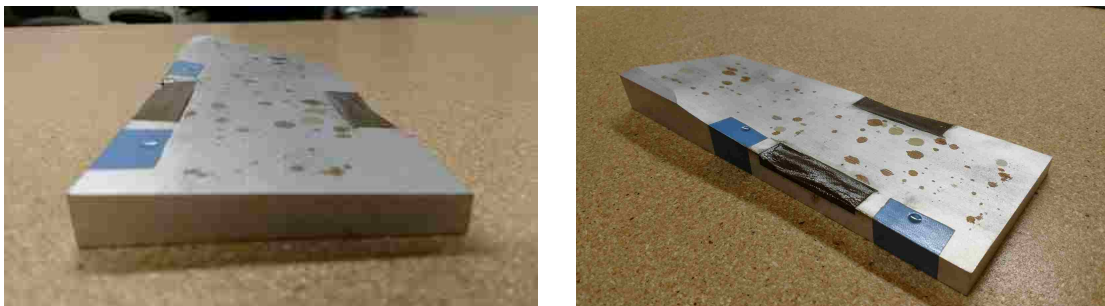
Machined aluminum tooling of twisted chord line for spar manufacture
